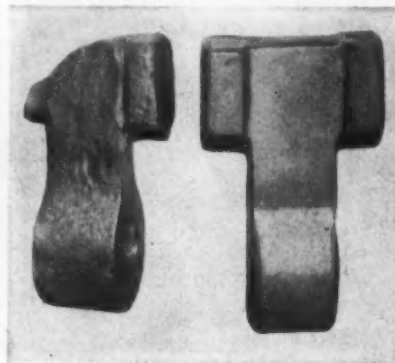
After crushing the same amount of abrasive material in a hammer mill, the badly worn steel casting (left) had a weight loss of 37 per cent while the high-chromium iron casting (right) lost only 5.5 per cent.
